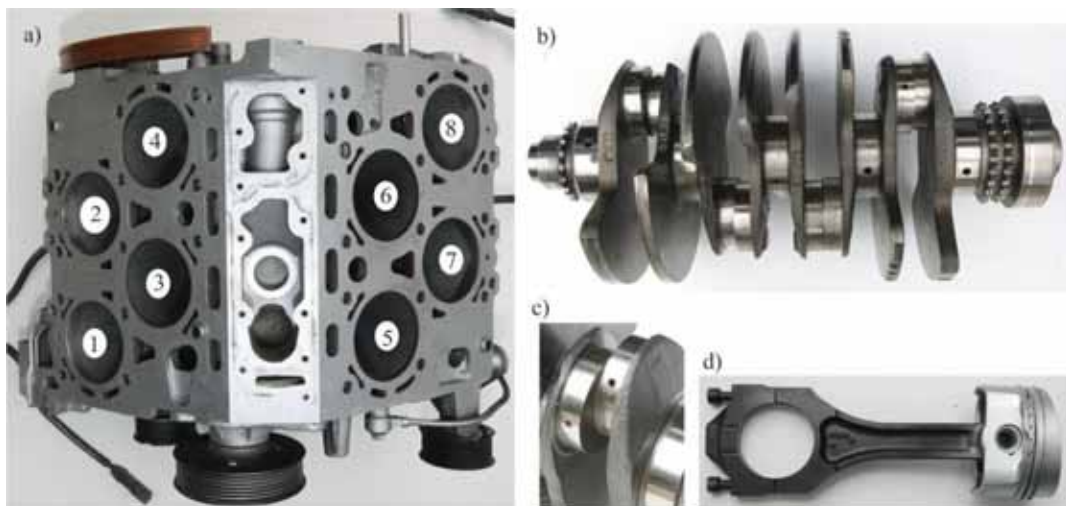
Components of a piston-crank system in a V-VR engine: a) block with cylinder order, b) crankshaft of a W8 engine, c) crankpin, d) piston with connecting rod
